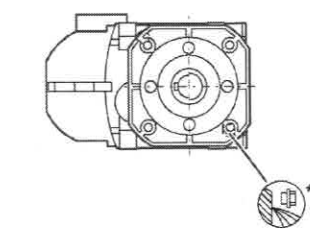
Mounting positions for parallel shaft gearbox F.F flange-mounted design and F.Z with housing flange, size 29
